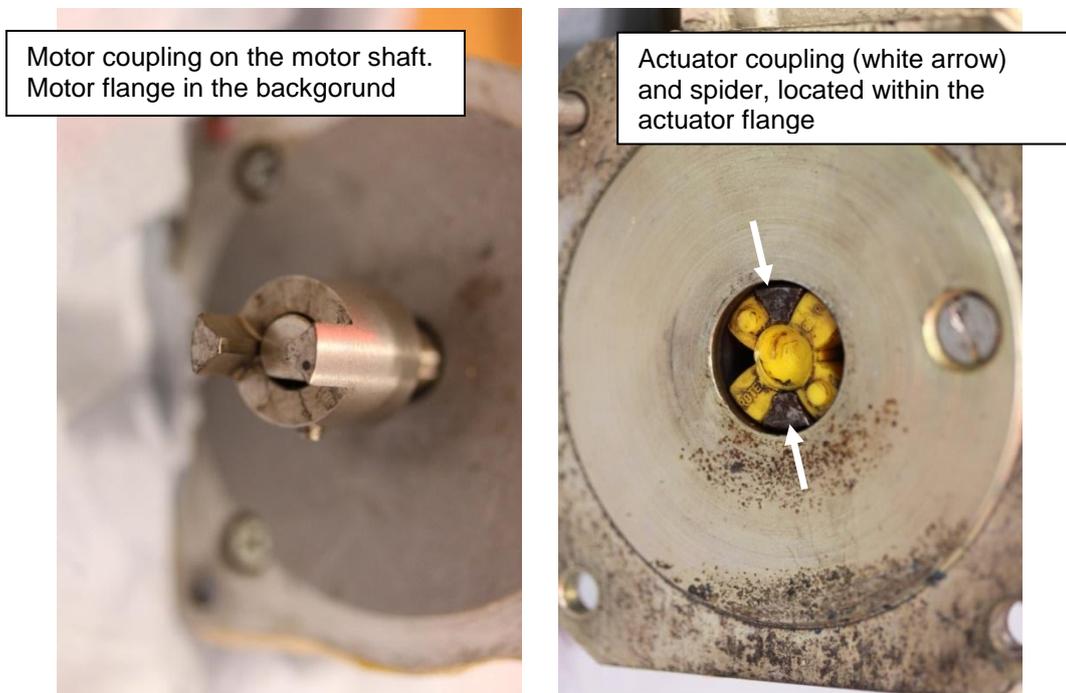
The images show the motor coupling and the actuator coupling with the spider, following disassembly. For scale, the outer diameter of the coupling is ~20mm.
